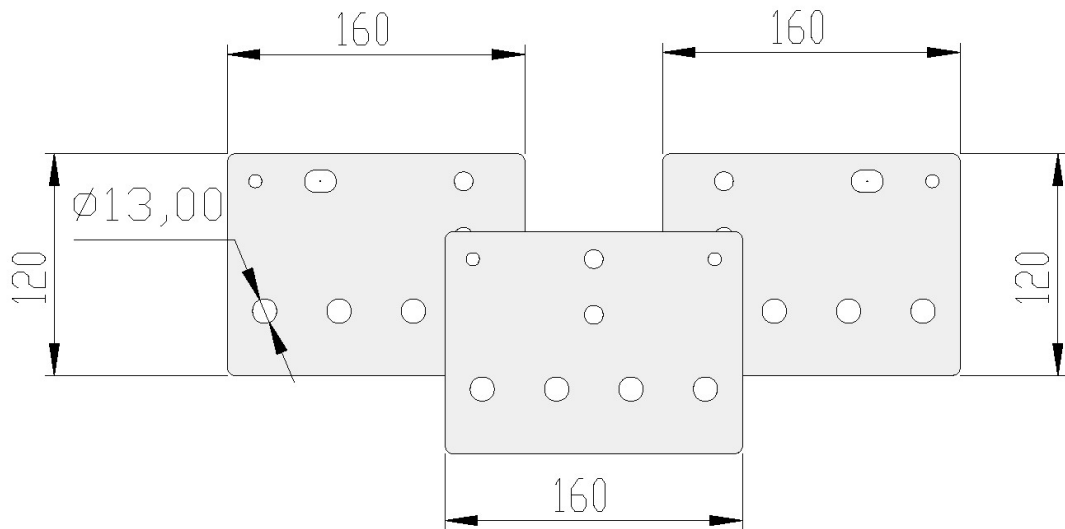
PWS1-500K series AC wiring copper bars dimension
